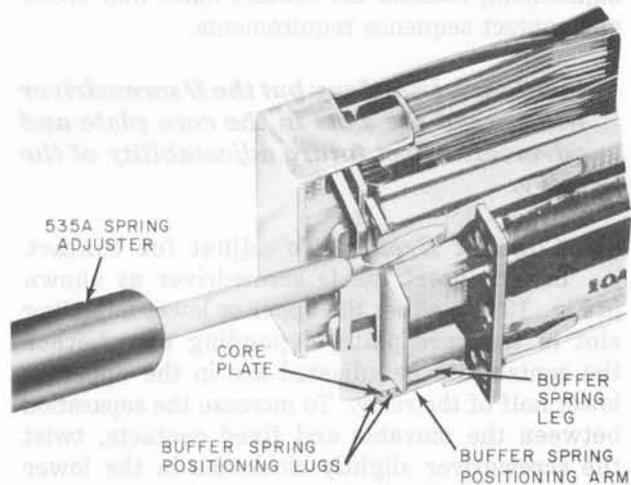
Method of Adjusting Buffer Spring Tension—Buffer Spring Positioned by Spoolhead
